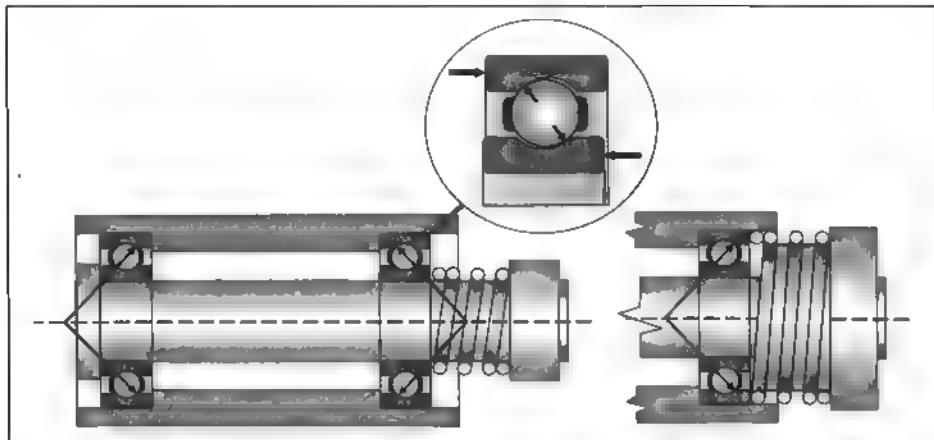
Two alternative ways of pre-loading bearings using a spring to provide the load in either of two directions. The expanded view shows the loadings on the balls and races.
